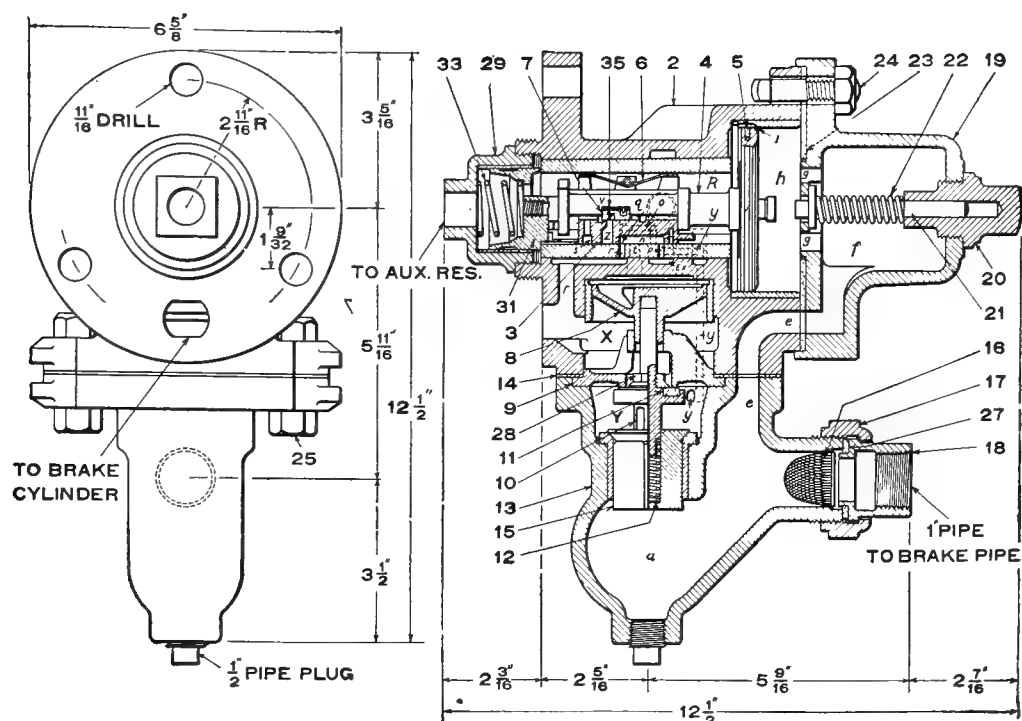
Quick Action Triple Valve, Style K-2, with Quick Service, Uniform Release and Uniform Recharge, for 10 in. Freight Brake Cylinders.
